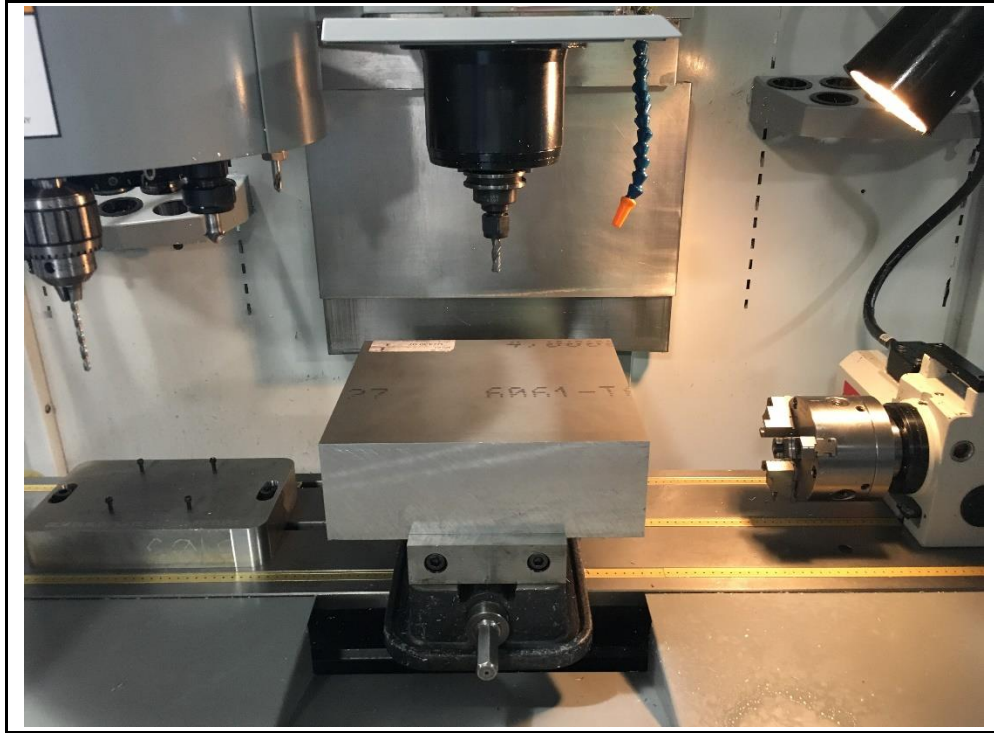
Female mold stock setup for Op 1 on Haas Tool Room Mill.
